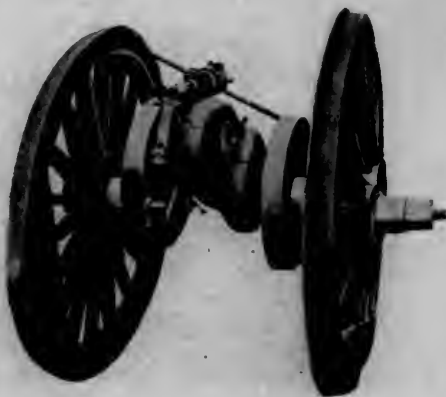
PORTABLE MACHINE AT WORK. AIR MOTOR DRIVE.
